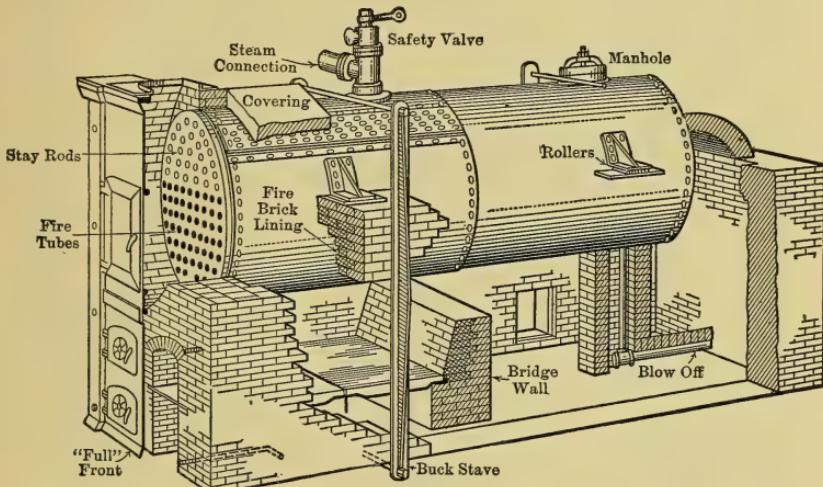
Horizontal Return-tubular Boiler with "Full Flush Front."
